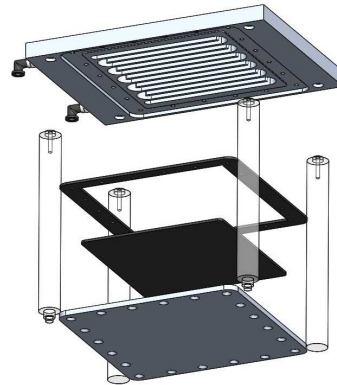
Sketch of the thermal base shown in figure 3.37. The coolant liquid circulates through a cooling coil. The aluminium parts are depicted in grey color. To contain the liquid two viton gaskets are used (pieces in black color).
